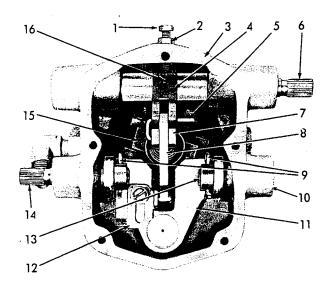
Travel Speed Governor - Cover Removed (T-35103)
